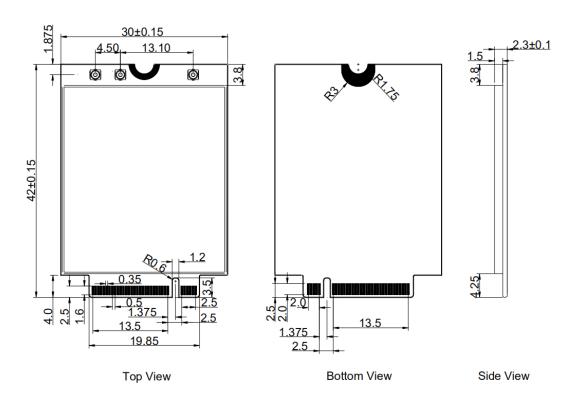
Mechanical Dimensions of EM12 (Unit: mm)
